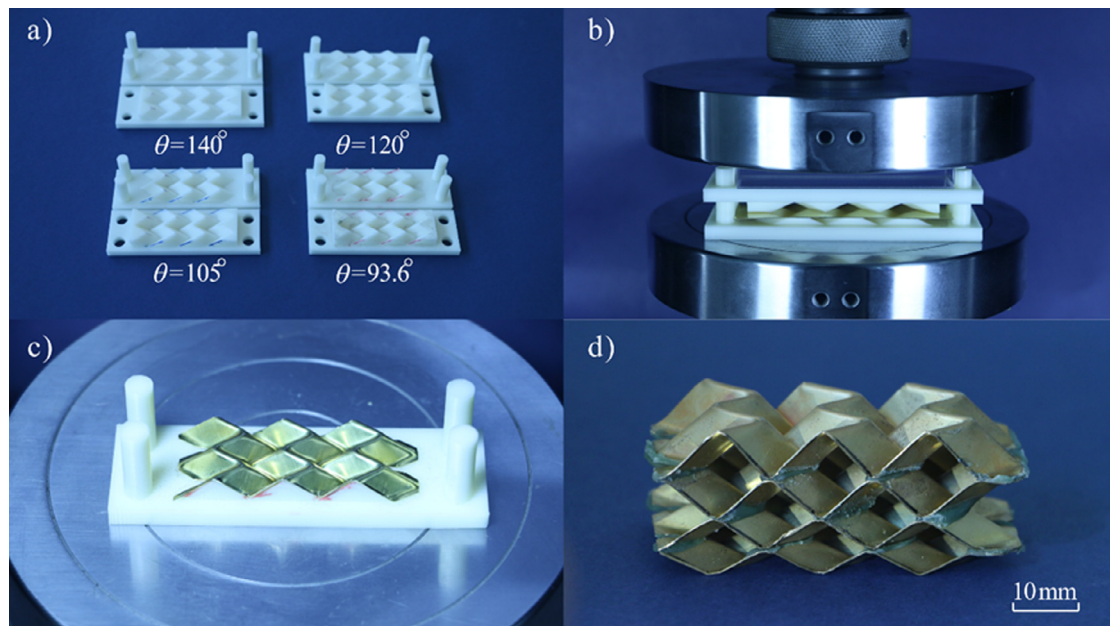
Fabrication of origami structures. (a) Moulds for stamping patterns on brass sheets; (b) Pattern stamping process using an *Instron5982* machine; (c) A patterned sheet after stamping; (d) A physical specimen of the graded structure 42-46-50-54.
